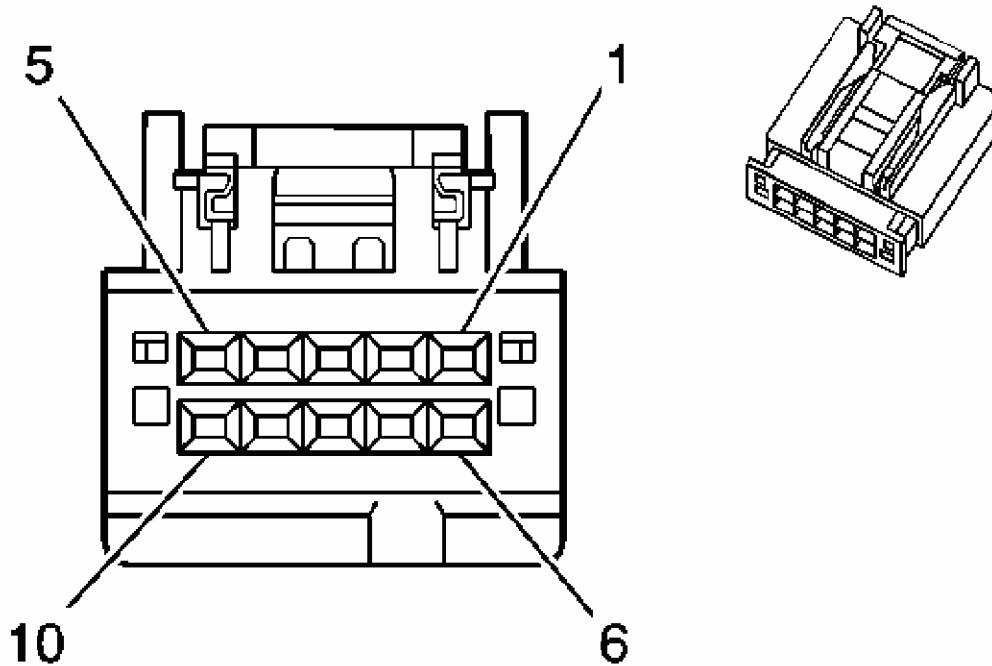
Steering Wheel Control Switch Connector End View - Left
